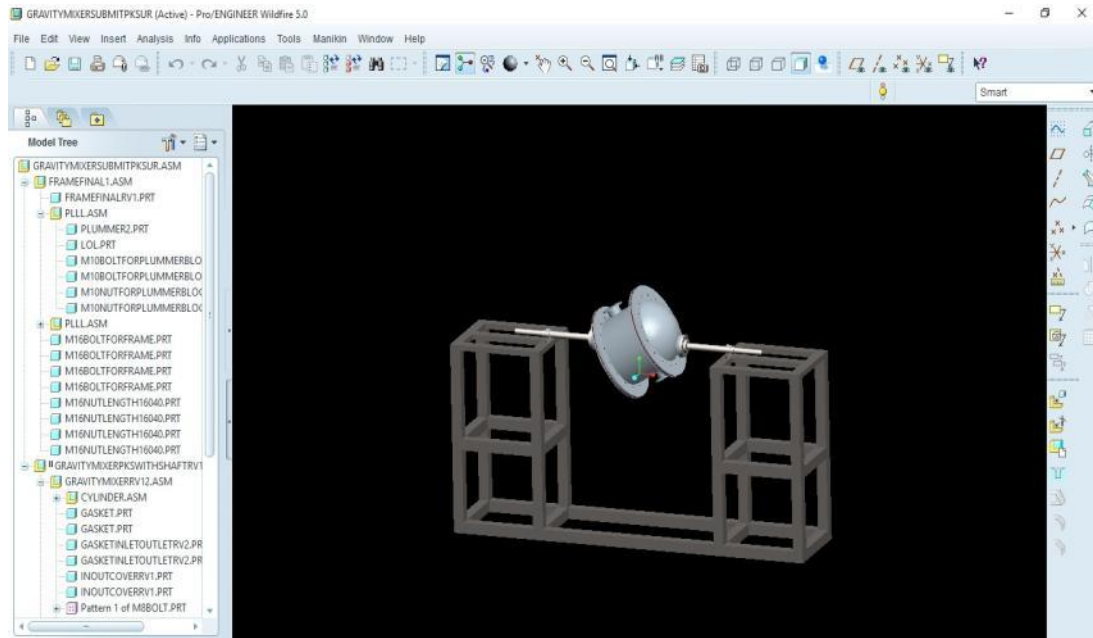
3D CAD Design of Bladeless Gravity Mixer.
